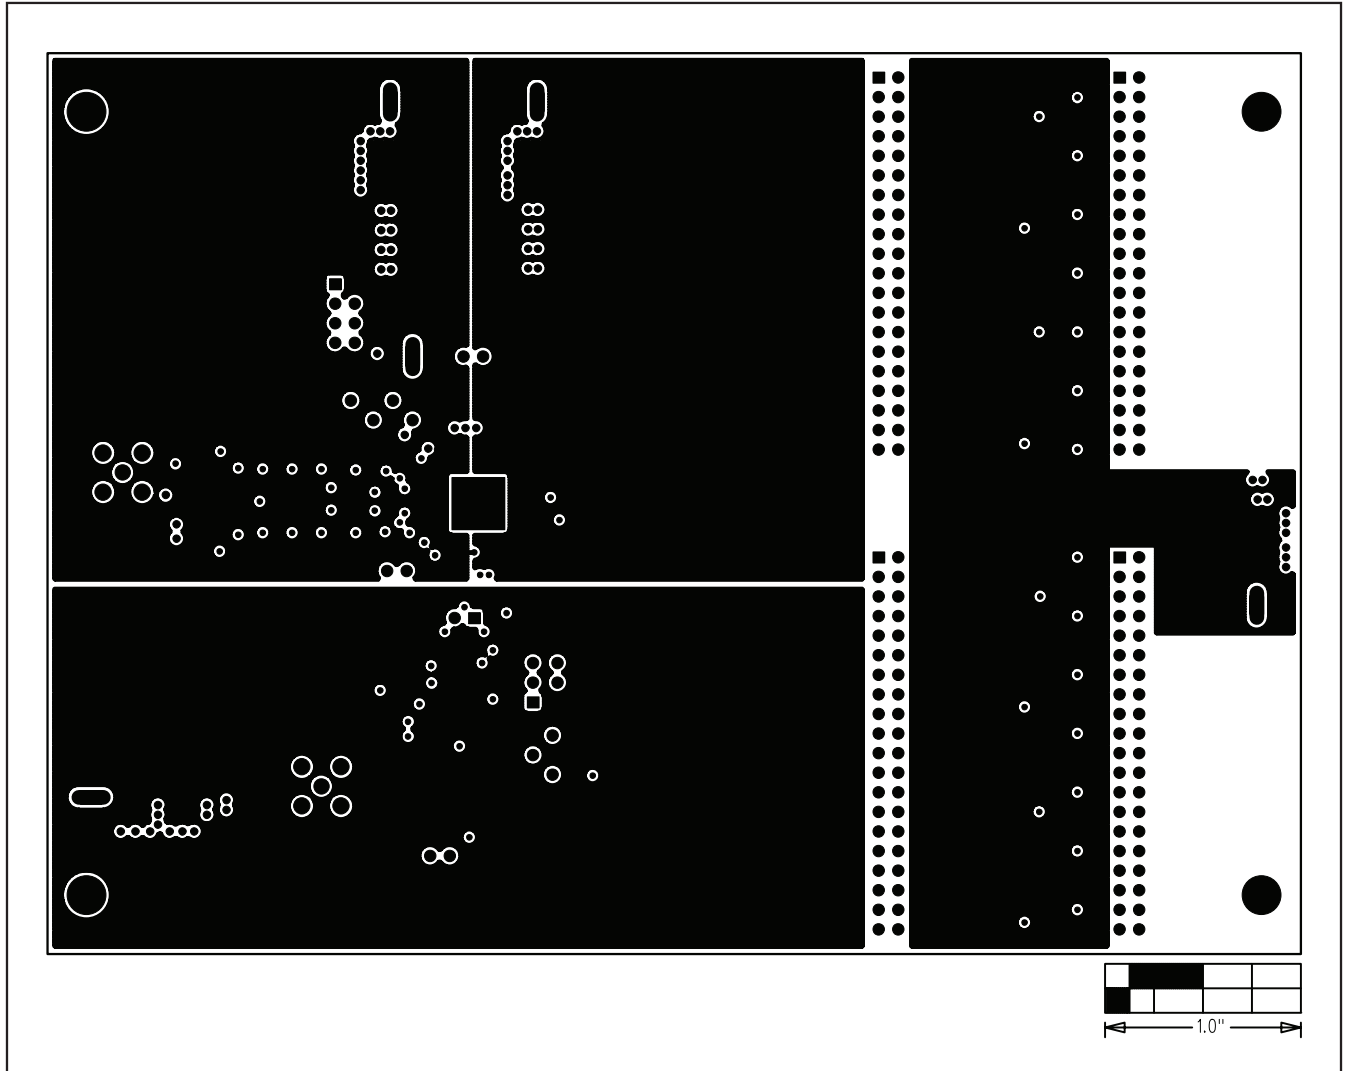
MAX1215N EV Kit PCB Layout—Power Plane (Layer 3)
